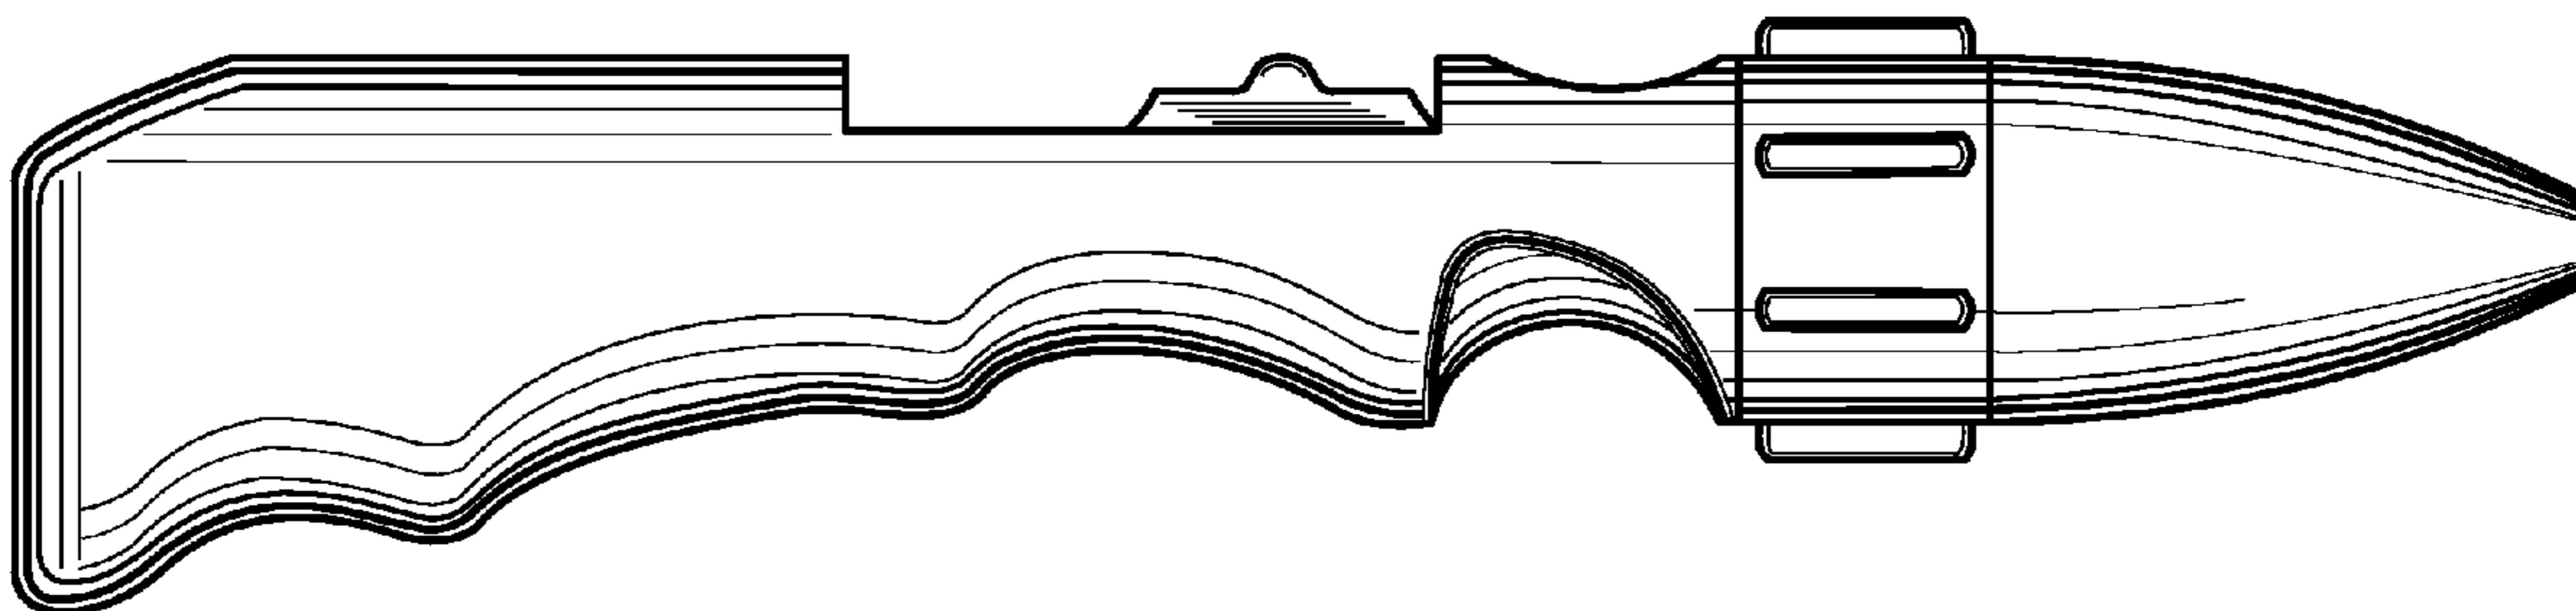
is a bottom side, elevational view of the catheter handle for the catheter shown in FIG. 1.
